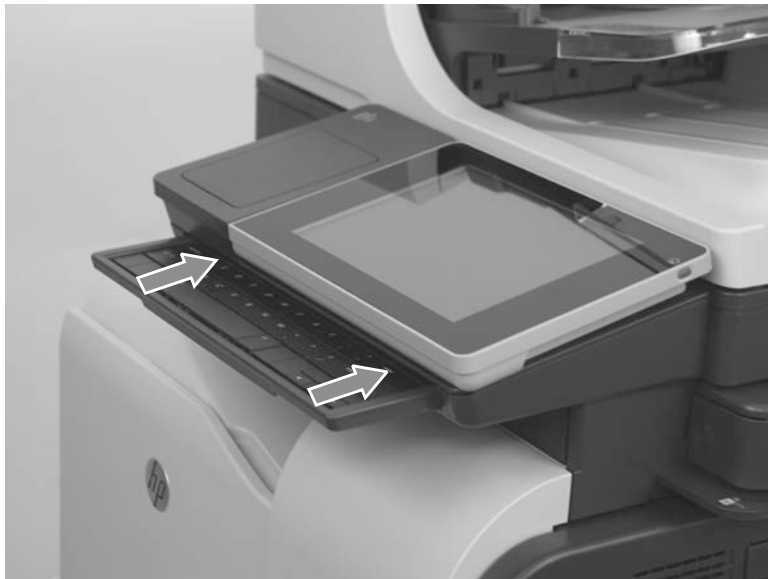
Reinstall the control-panel assembly (12 of 13)
